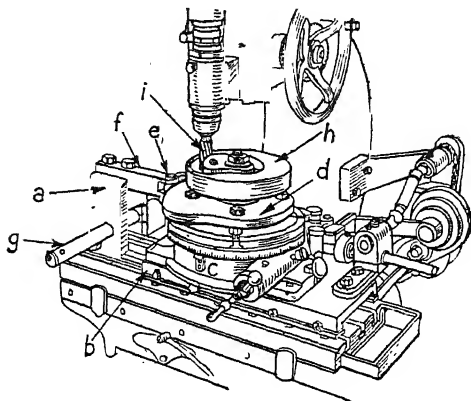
Milling a face cam with groove on a vertical milling machine: *a*, base of fixture; *b*, slide moving on base; *c*, circular table; *d*, template (open cam); *e*, tracer roller; *f*, bracket for holding roller *e*; *g*, hand-operated shaft operating rack and pinion drive; *h*, face cam to be machined; *i*, end mill.
